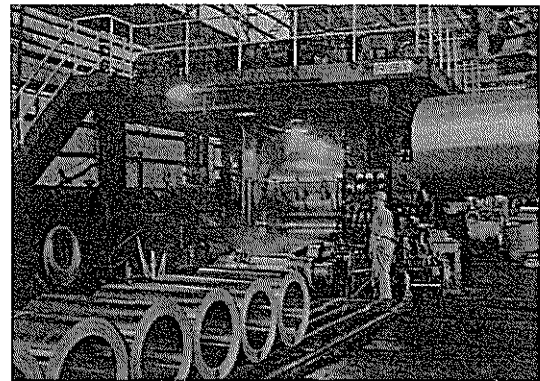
4 Hi-2 stands tandem cold rolling mill
